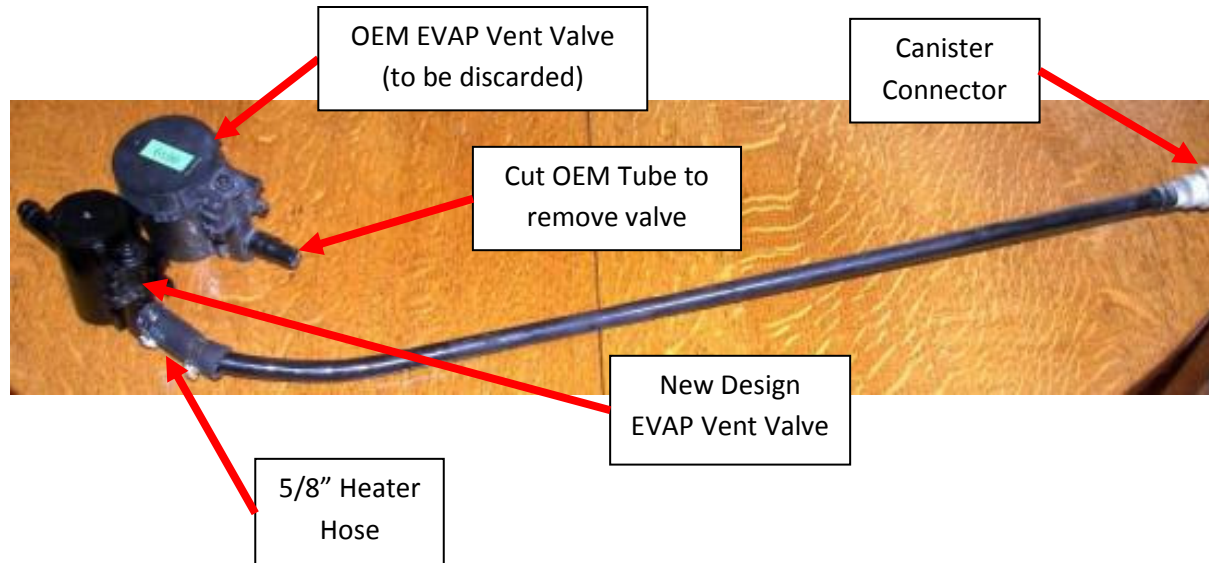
New Design Vent Valve and tube assembly after modifications
